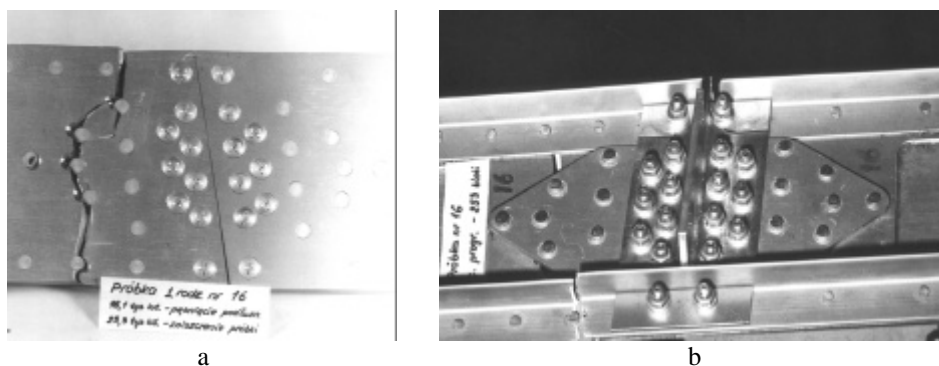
The crack course in specimen 1.1.1d, a – the skin side view, b – the stringers side view.
